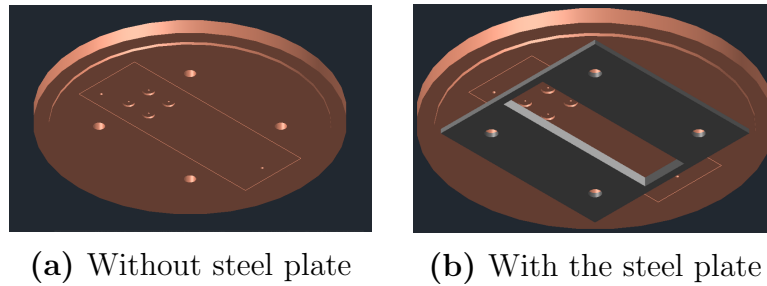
Bottom isometric view of the chuck, where the microfluidic chip is held
